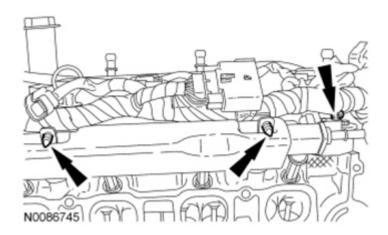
Locating VCT Oil Control Solenoid Electrical Connector And Wiring Harness Retainer Courtesy of FORD MOTOR CO.
